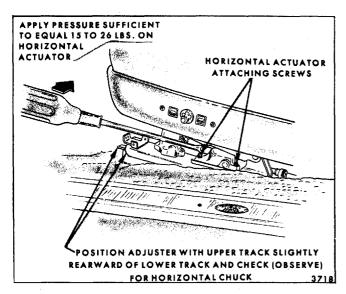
Horizontal Actuator Adjustment - Power Six-Way Seat
